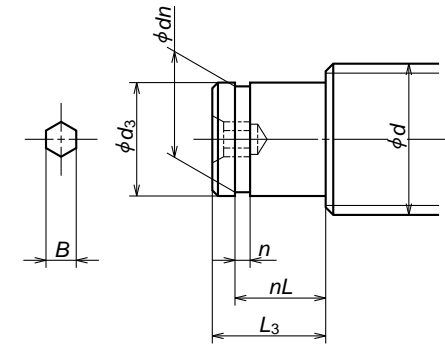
Shaft end configuration of R Series (opposite to the drive side)
